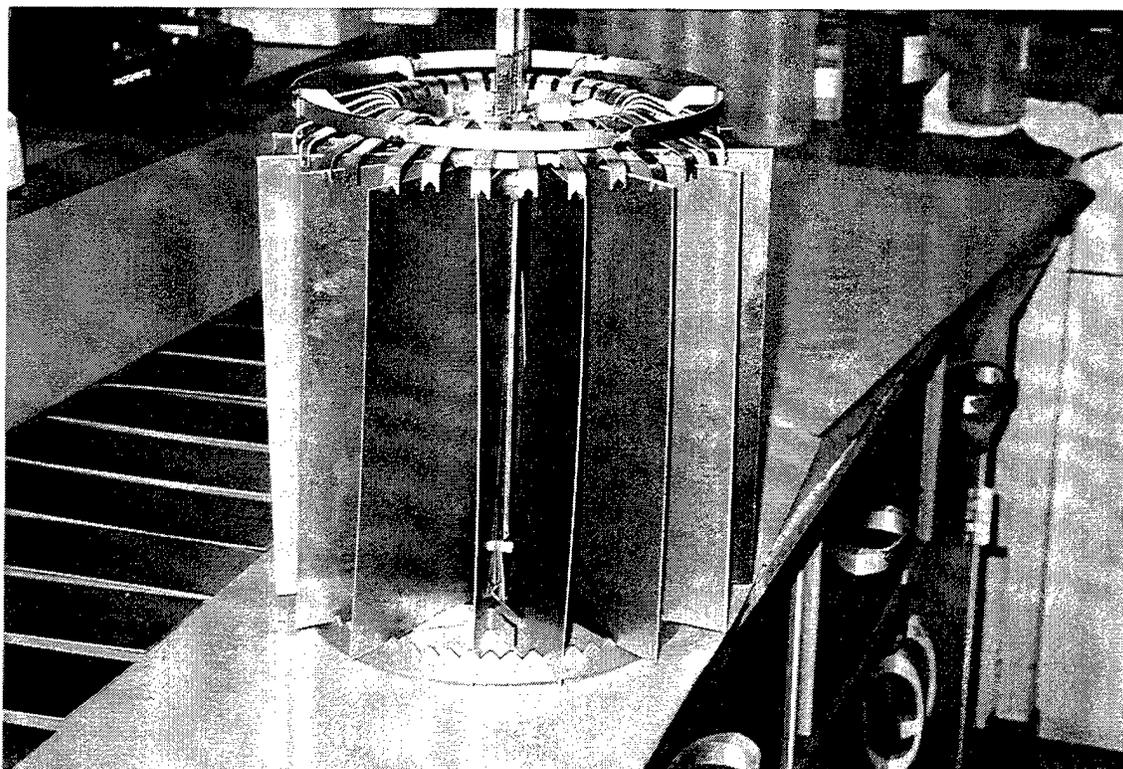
Panels secured for immersion degreasing in laboratory cleaning tank.
